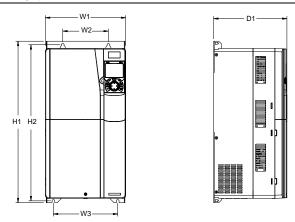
Wall-mounting diagram for 380V 45-75kW models
